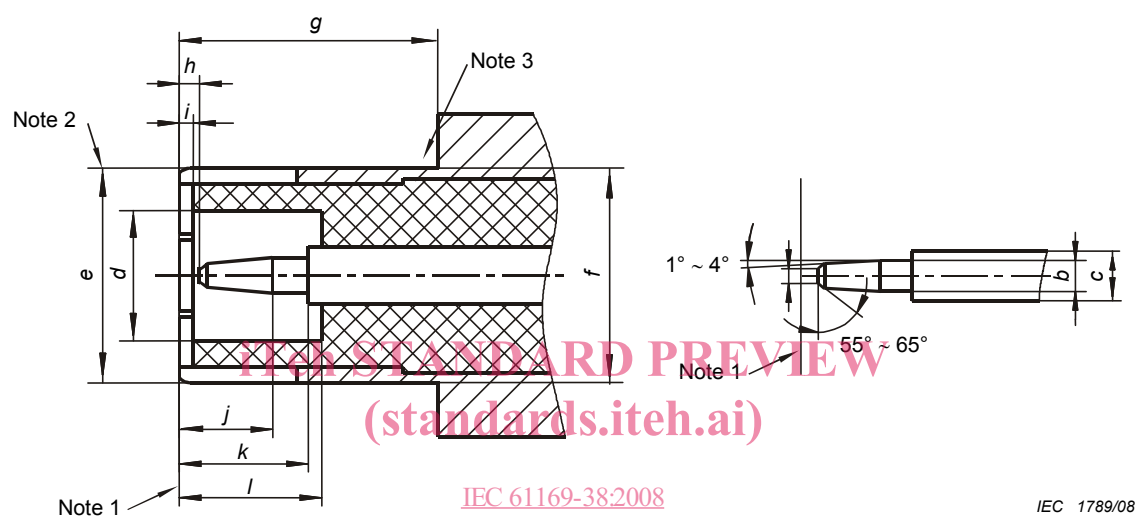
Connector with pin centre contact (for dimensions, see Table 1)
